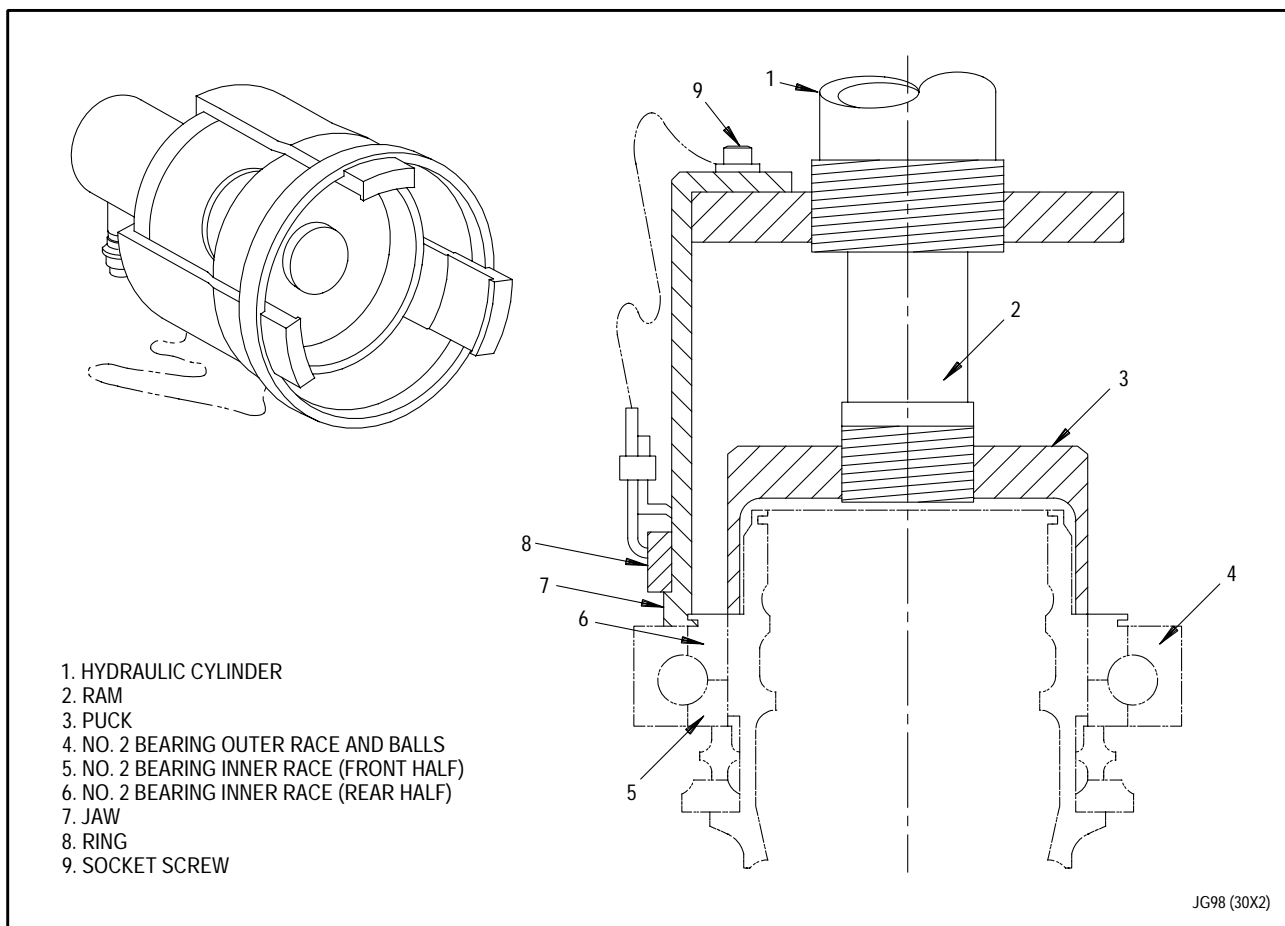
No. 2 Bearing Inner Race (Rear Half) - Removal With PWA 50606 Puller
